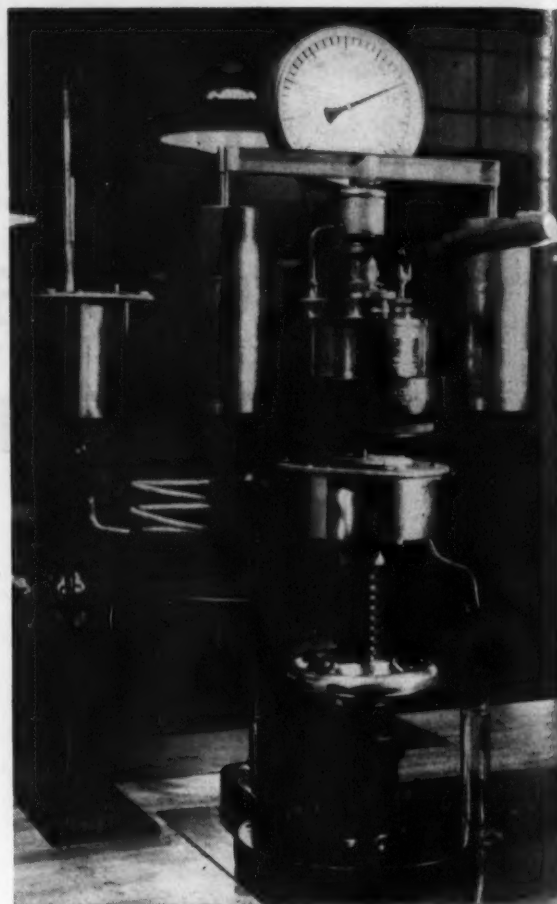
Brinell hardness testing machine equipped with cold hardness attachments.
